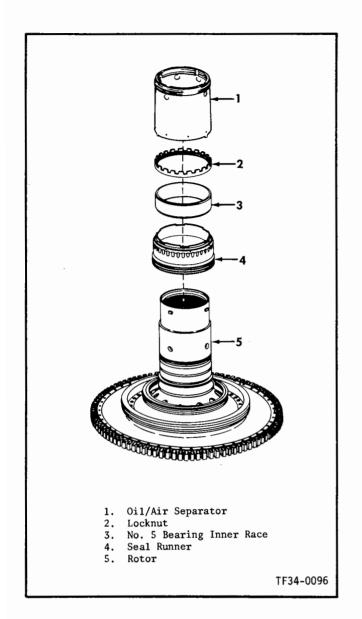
Disassembly of High-Pressure Turbine Rotor
